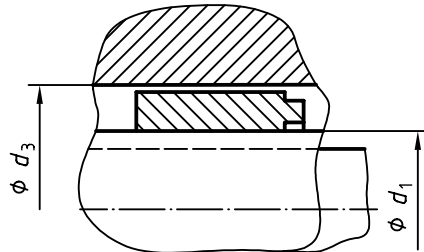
Mechanical seal or soft packing with or without a sleeve
